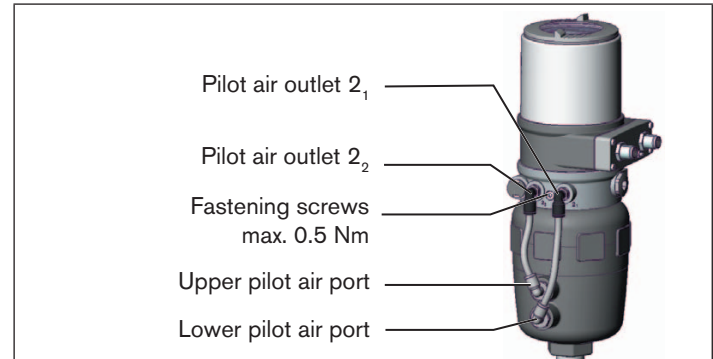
Installing the pneumatic connection to actuator, series 26xx and 27xx
